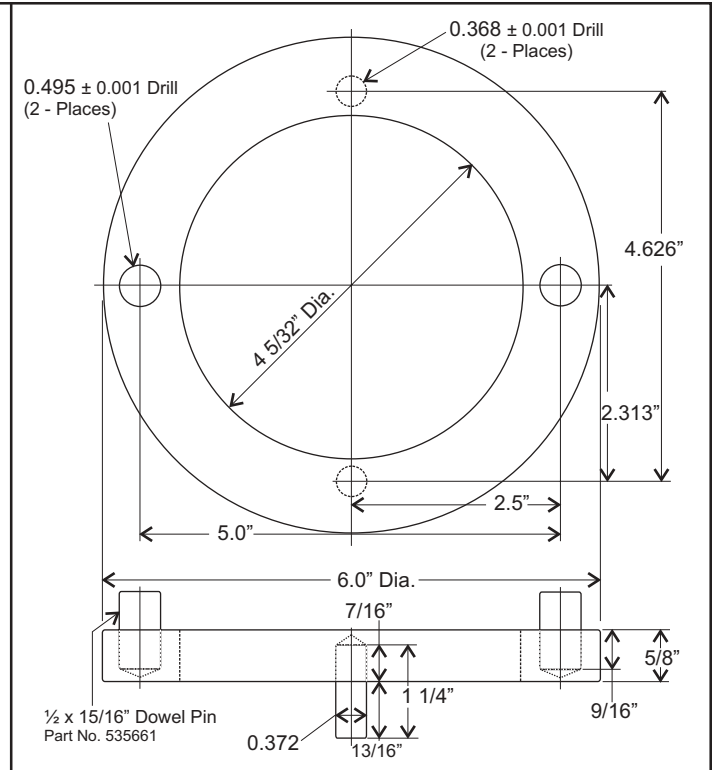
Piston Assembly Jig for Removing and Installing Lock Plug 6 1/2 and 7 1/2
